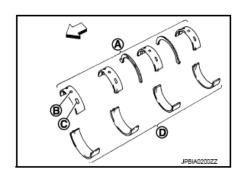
Identifying Main Bearings With Oil Holes And Grooves
